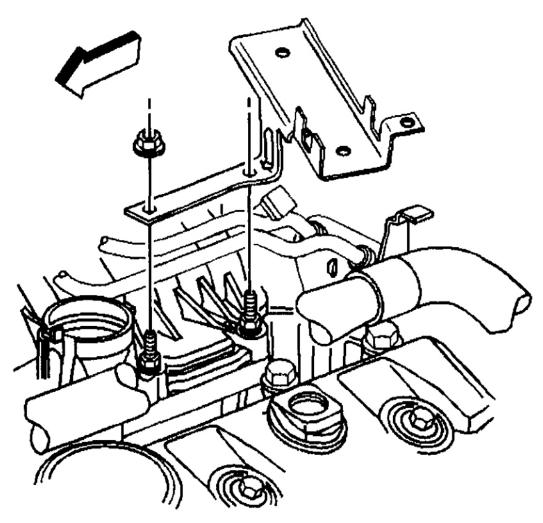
View Of TP Sensor, IAC Motor, ECT Sensor, Control Port Injector Module & Engine Harness Clip Bolt Courtesy of GENERAL MOTORS CORP.
